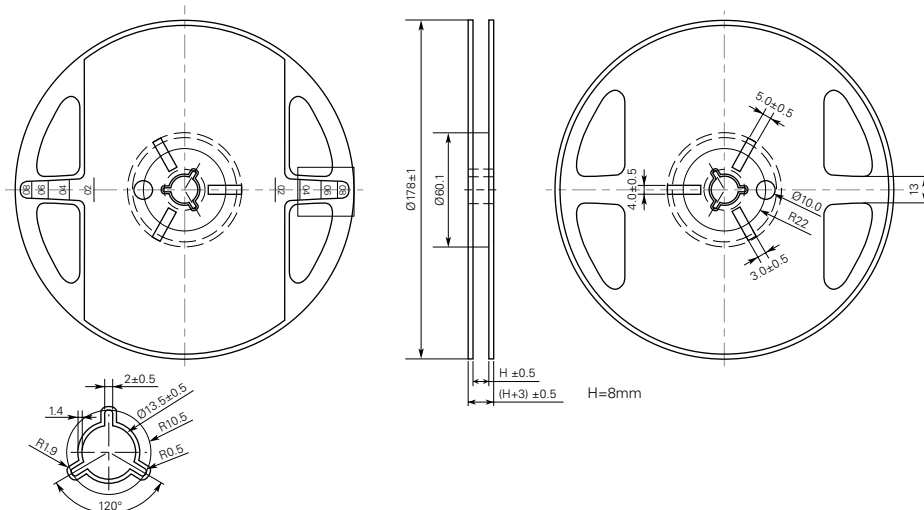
Reel Dimensions for ZENxxxVyyyAzzYM Devices in Millimeters (mm)
